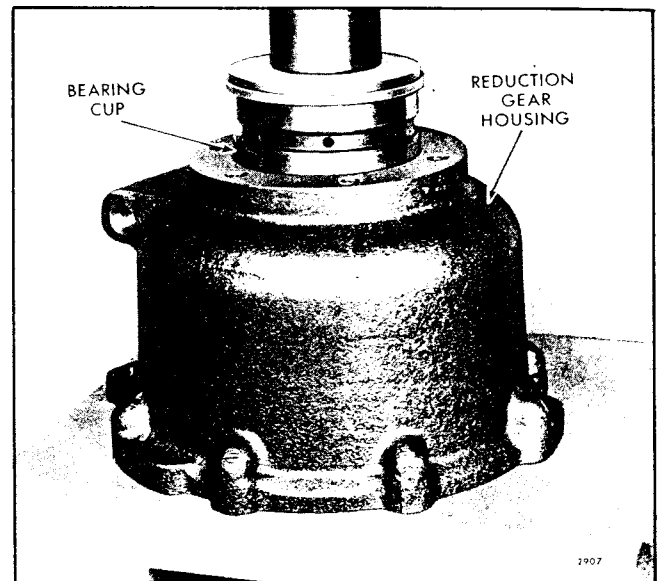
Installing Reduction Gear Drive Shaft Bearing Cup in Gear Housing
